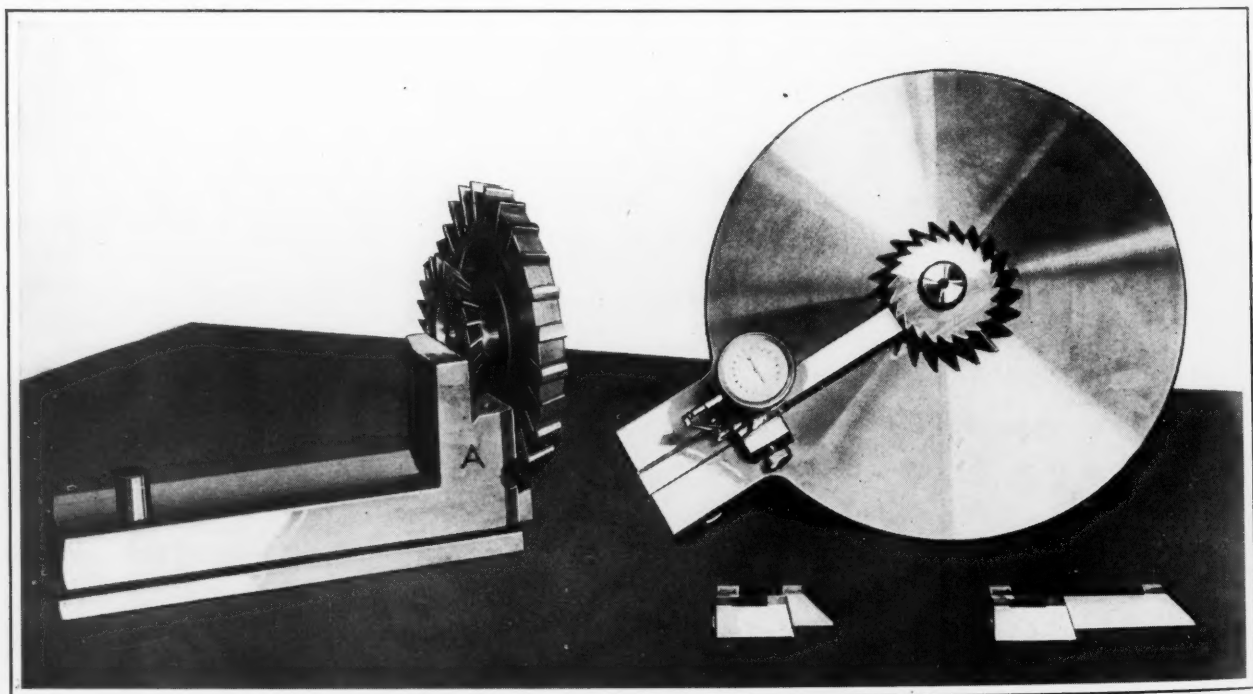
Fixture for Inspecting Cutters Used for Milling Chaser Slides for Pipe Die-heads
